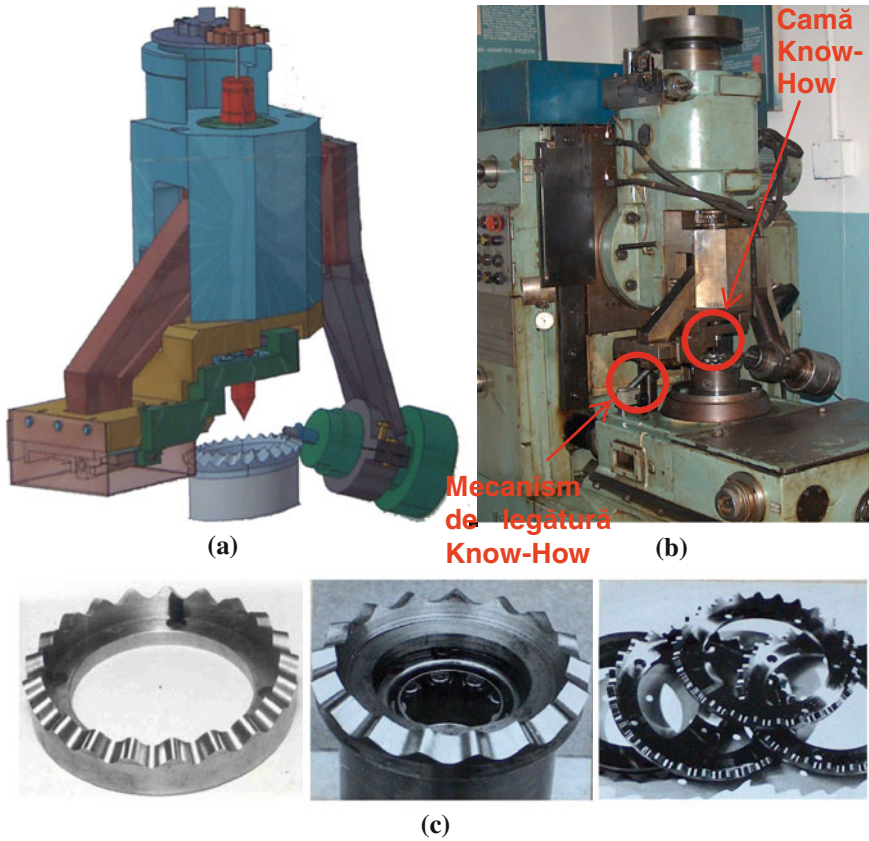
Generation device for gears with non-standard profile (a), machine-tool with fabricated device (b) and samples of fabricated gears (c)
